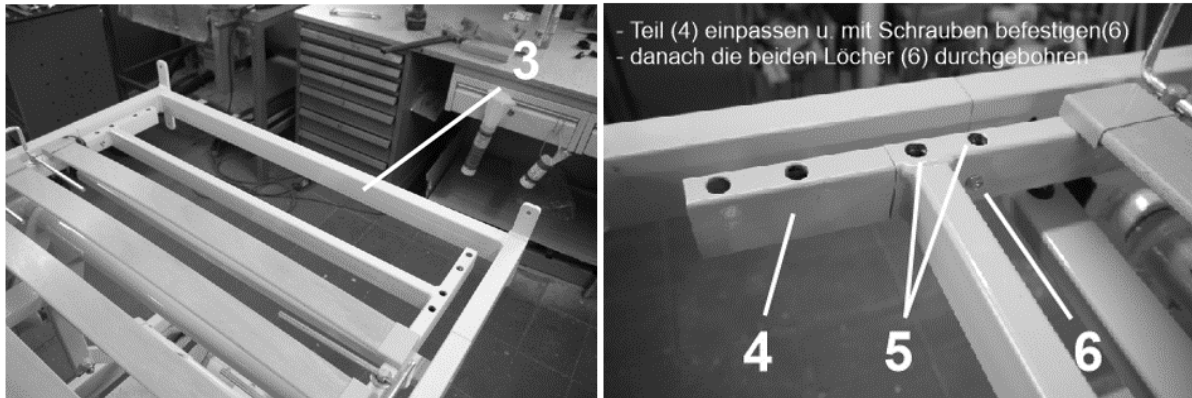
Assembly of the head crossbar and headboard extension (220 cm lying surface length)
